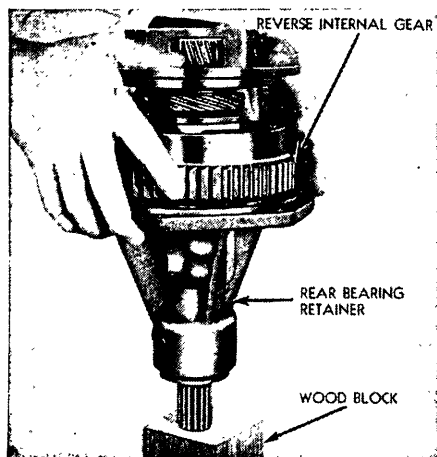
Remove reverse internal gear support bolts, bounce shaft on wood block to remove rear bearing retainer
